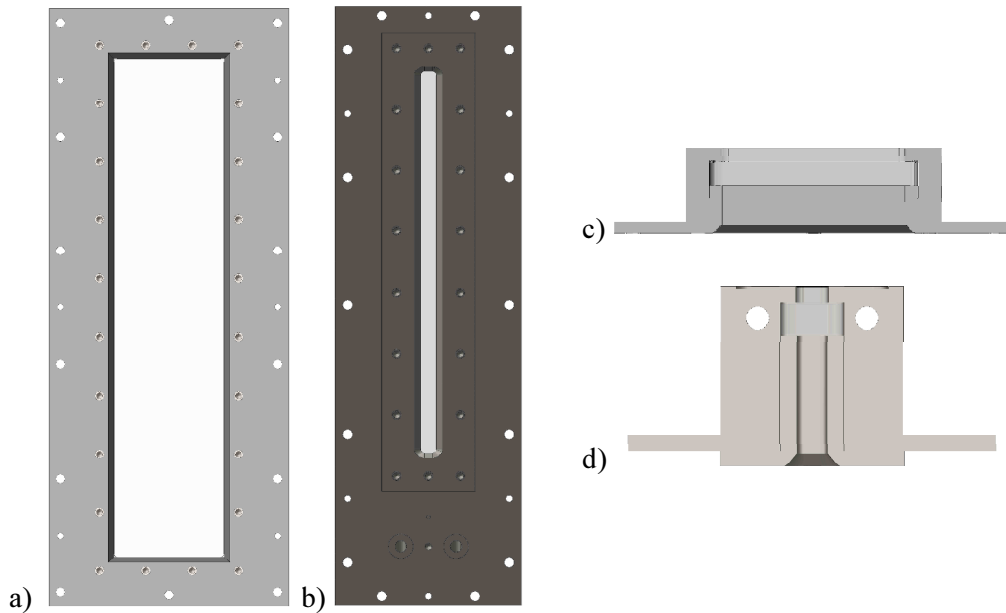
Combustor section side window frame assembly and observation window assembly: a) Side window frame assembly, b) Observation side window frame assembly, c) Side window frame cross-section, d) Observation window frame cross-section.
